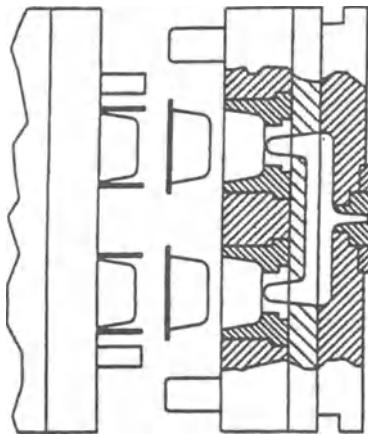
Insulated hot-runner mold with runner removed for easy startup.
